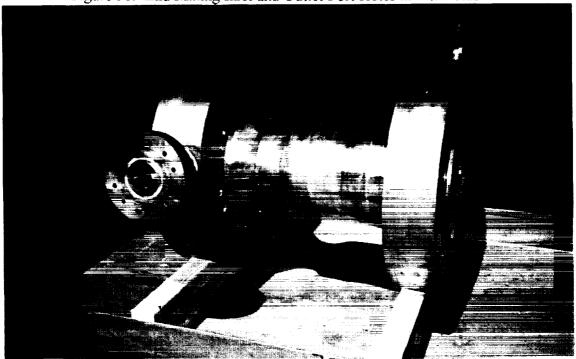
View of Copper Tube Bundle Chamber With Coolant Ports Installed.
